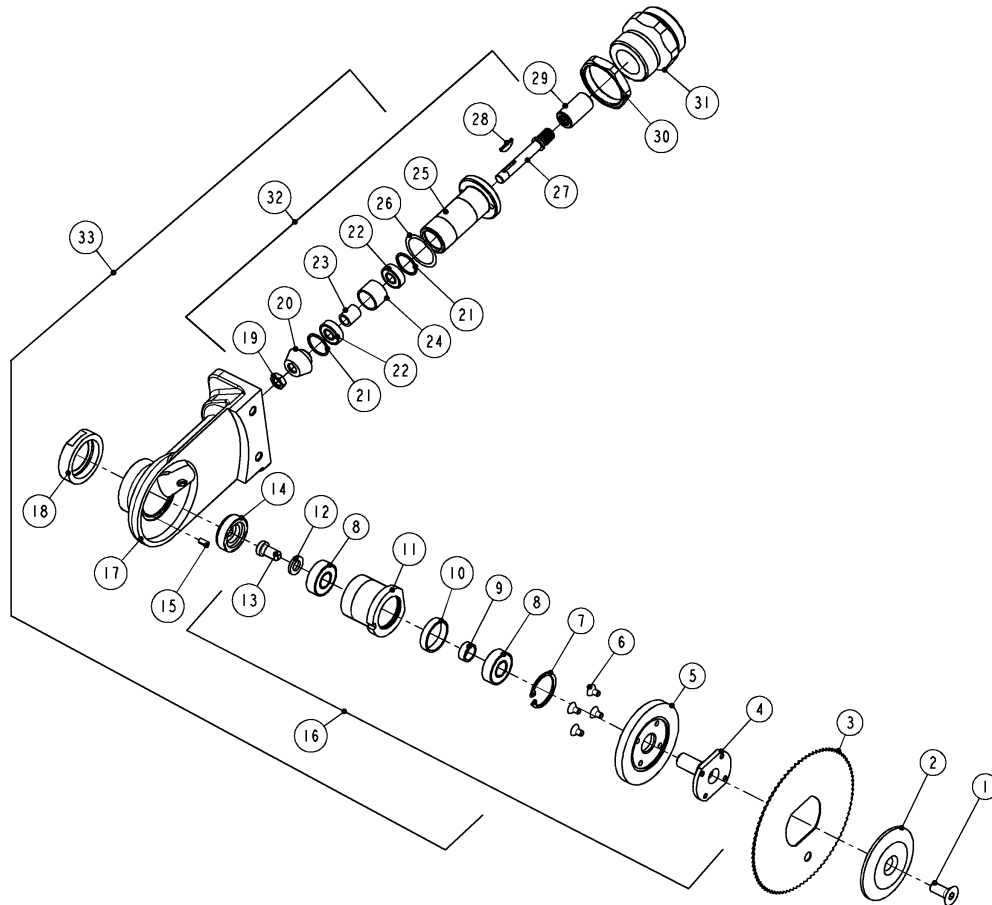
6220201: DRIVE CARTRIDGE ASSEMBLY
